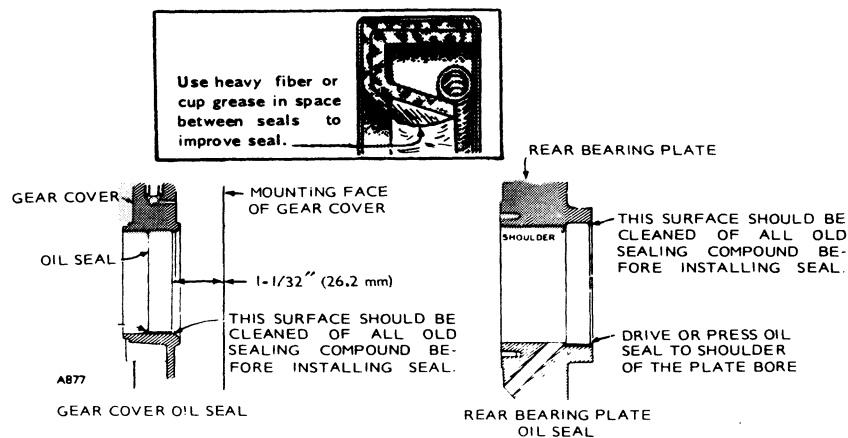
GEAR COVER AND REAR BEARING PLATE OIL SEALS
